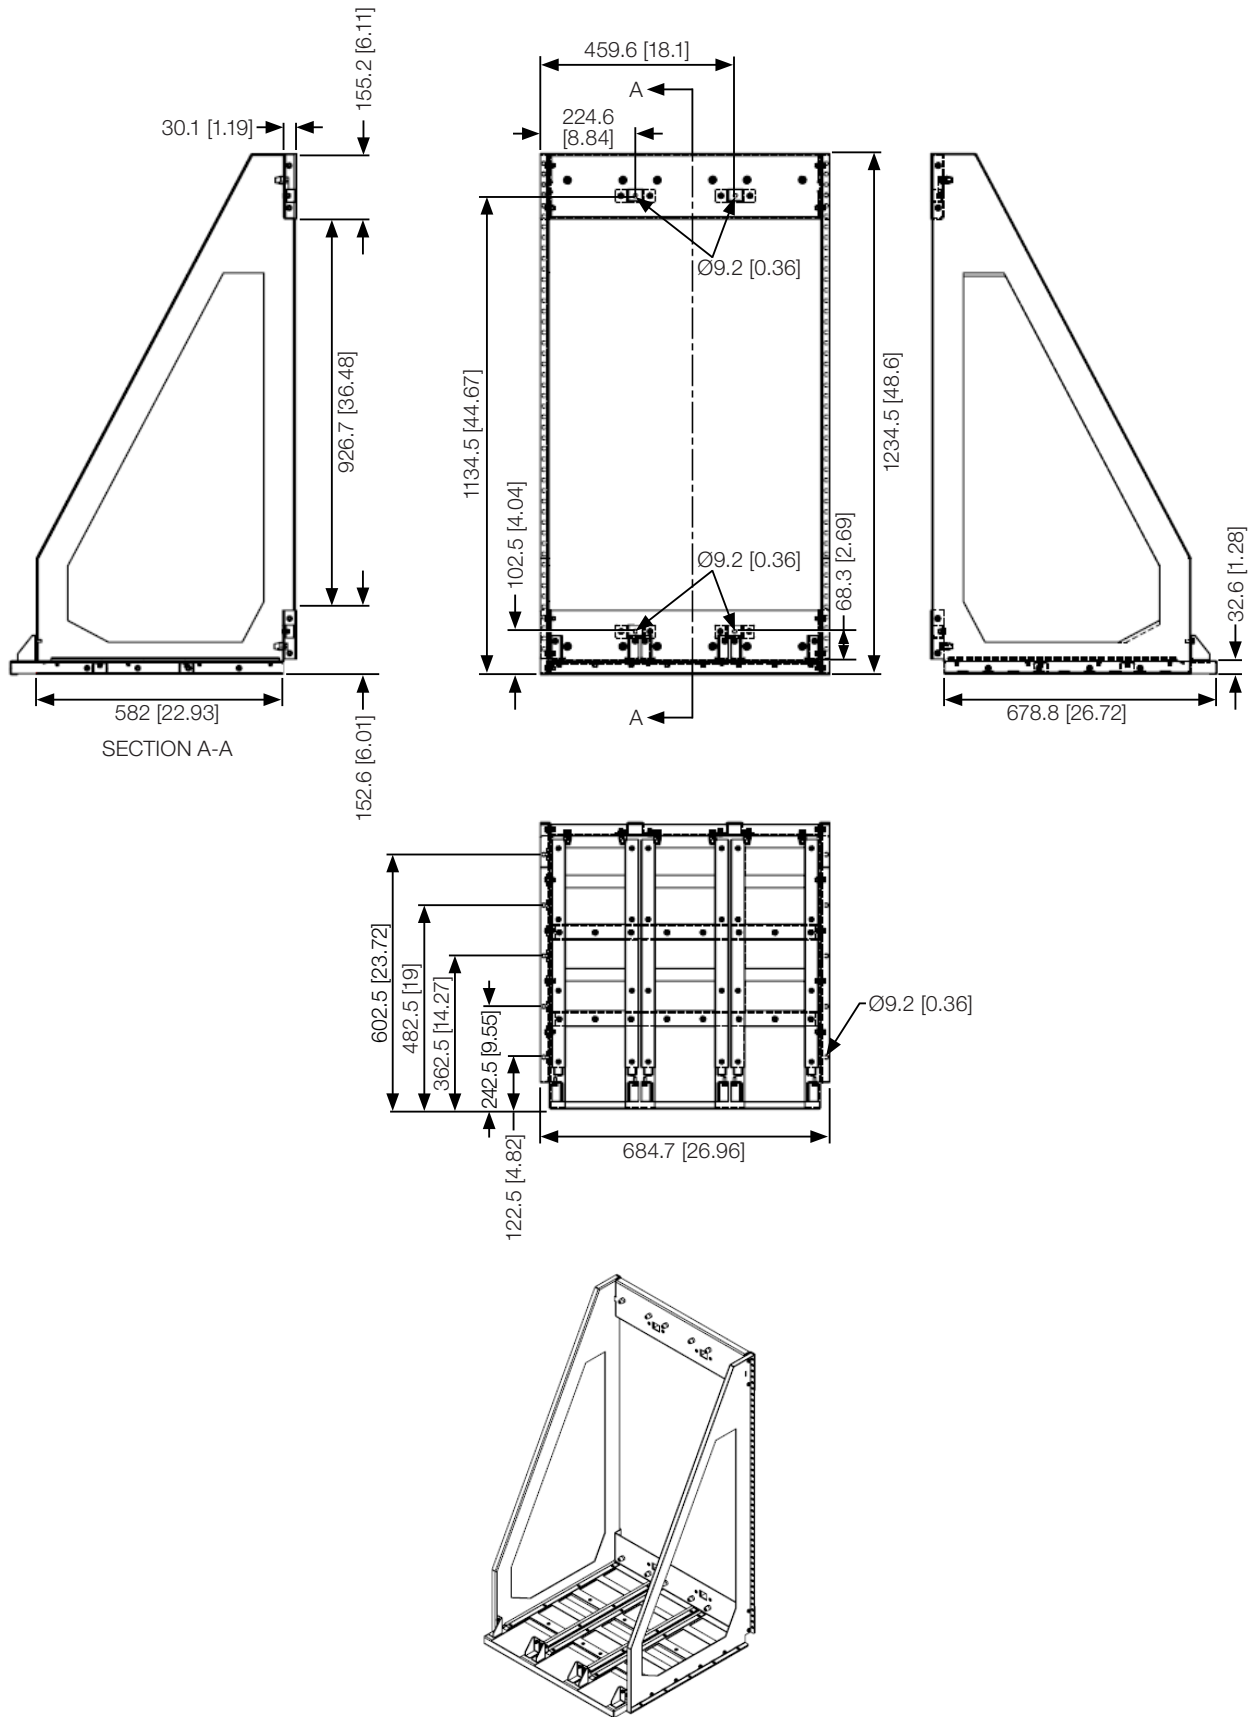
Dimensions of Rack 3 G2 in mm [in]
